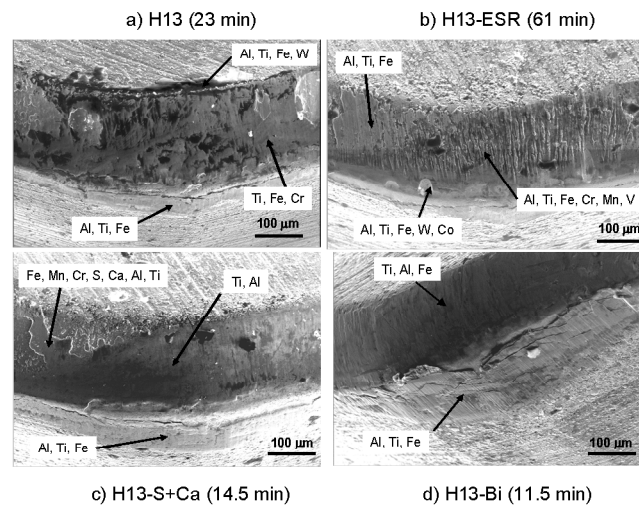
Tool wear (flank region) at mid-tool life (H13 steels)
